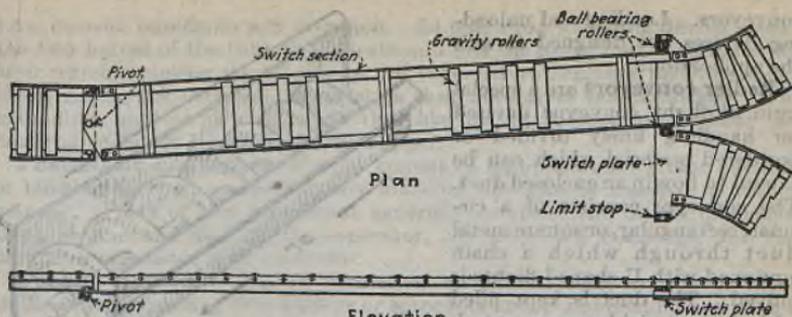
Gravity roller conveyor, showing switch section, indicating flexibility of such equipment.
